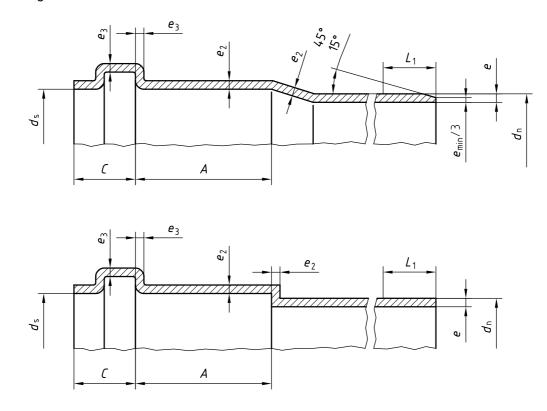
Dimensions of sockets and spigot ends for ring seal joints
